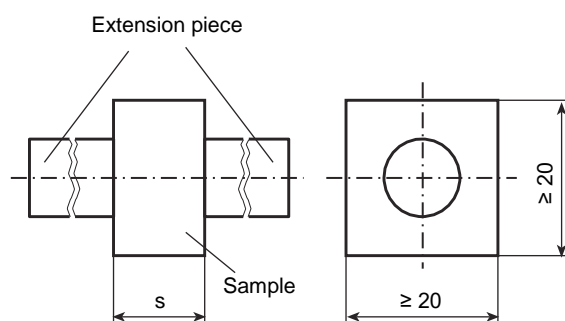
Specimen blank, consisting of test piece and welded-on extension pieces
